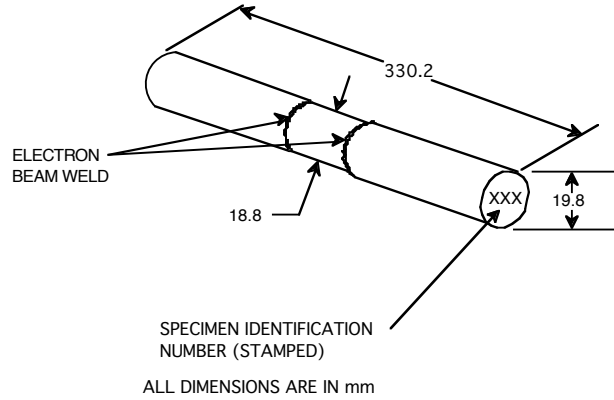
Schematic diagram of electron-beam-welded bar for machining A302-Gr B fatigue test specimens.
